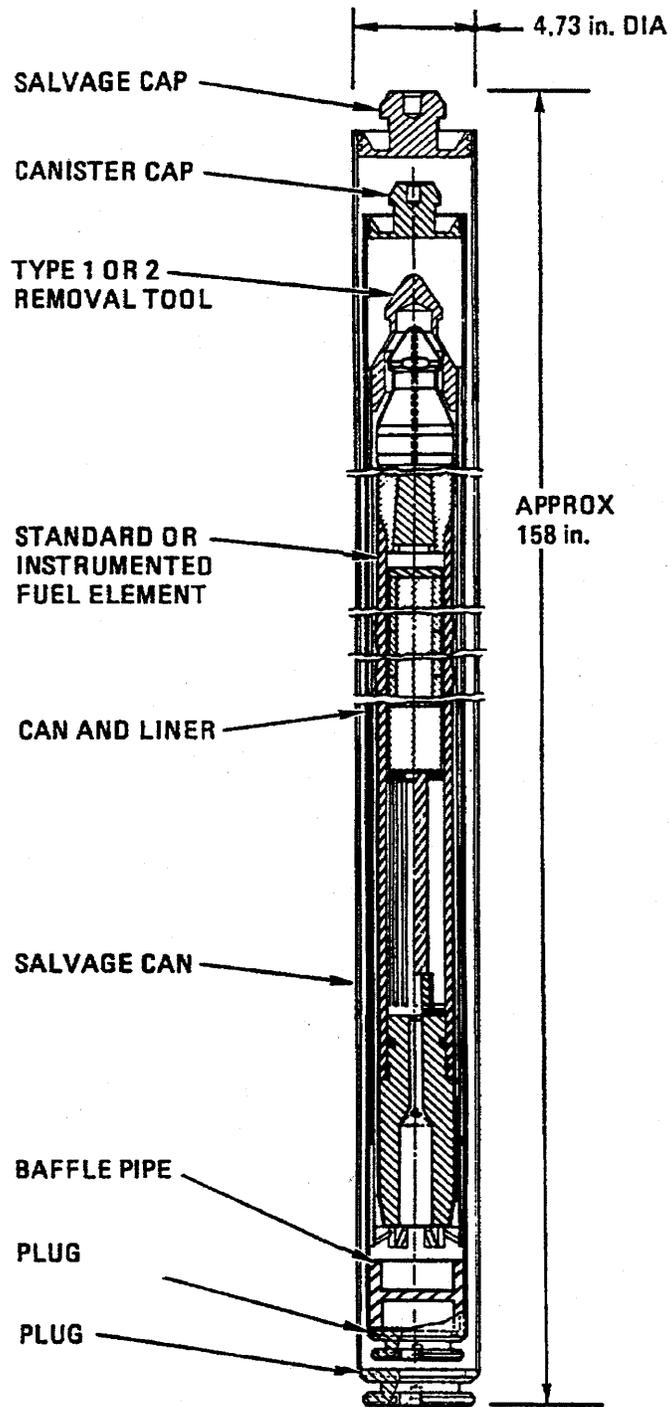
Aluminum Canister with PB-1 Core 1 Fuel Element with Assembly Removal Tool (with Salvage Can)
